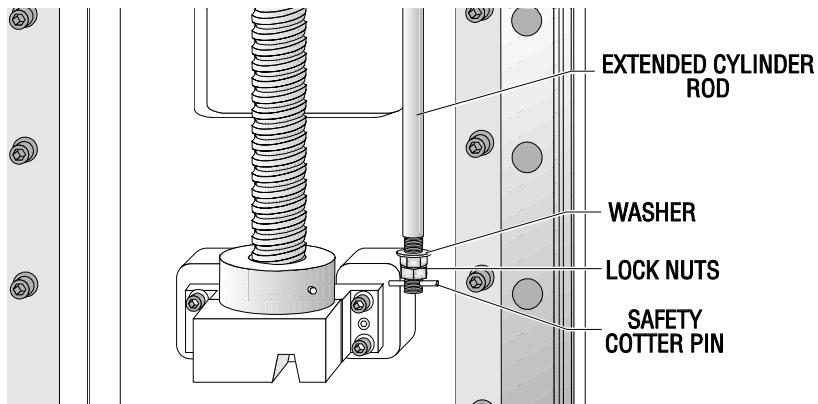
Hydraulic Cylinder Rod Installation.
